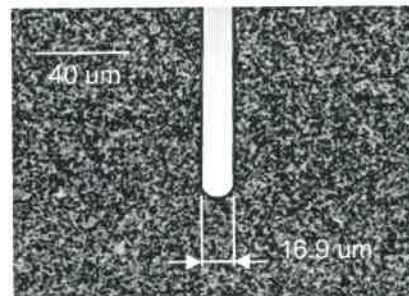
Minimum kerf with 15 μ m tungsten wire. Carbide 1.5mm, Surface finish 0.5 μ mRz, 1 cut
